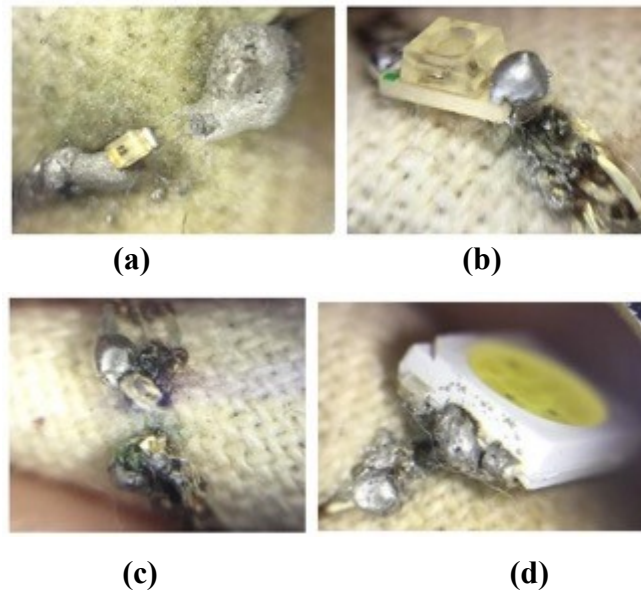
Types of joint failure: (a) between solder joint and LED lead, (b) between solder joint and thread, (c) within LED, and (d) within solder joint
